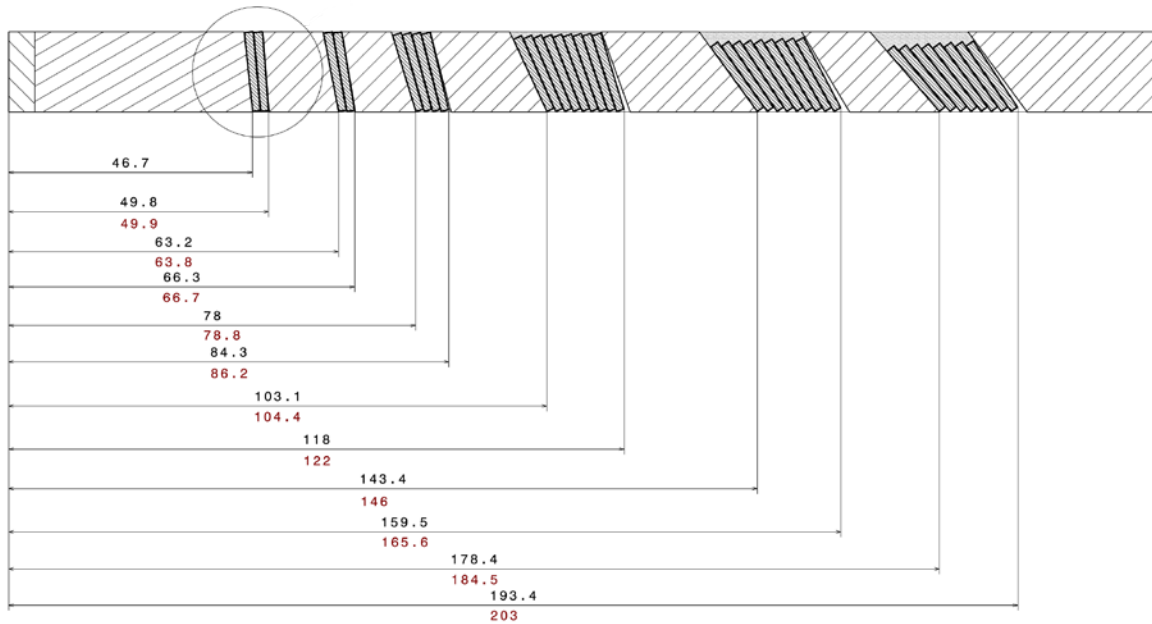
Sketch of the cross section of the LOC coil end (at 90°) as designed (in black) and as built (in red). The dimensions refer to the inner radius.
